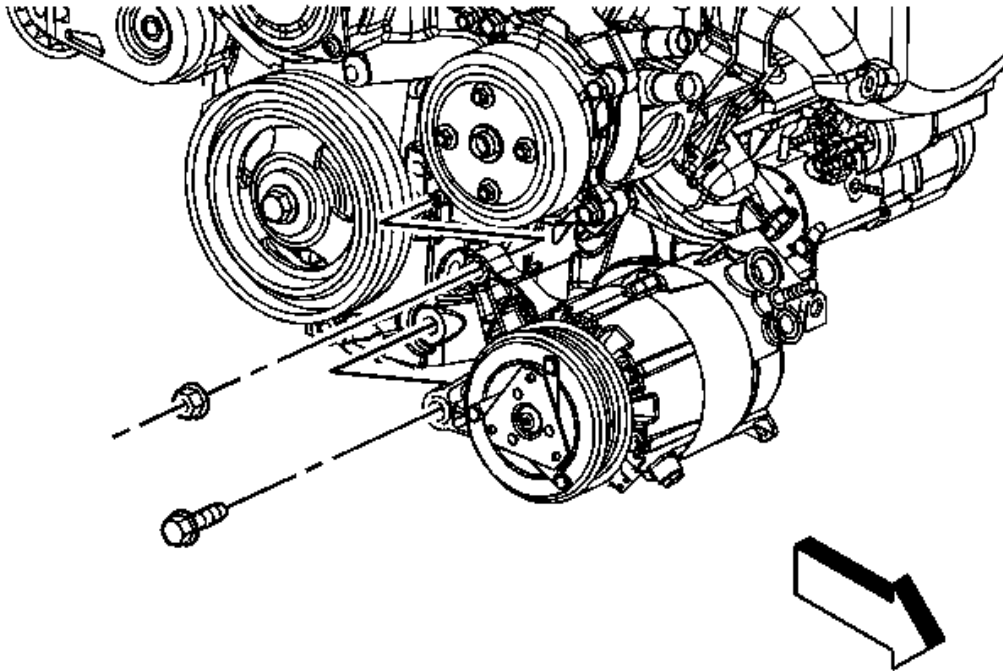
View Of Air Conditioning (A/C) Compressor Front Bolt/Nut
